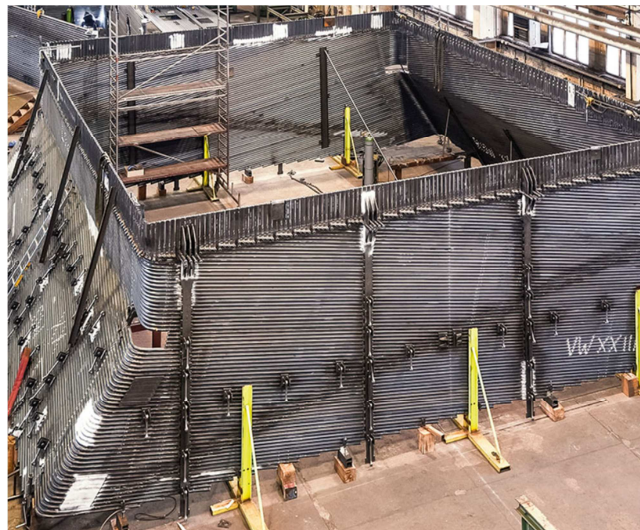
Steam Boiler – Foundation of Membrane Pipe [46]
